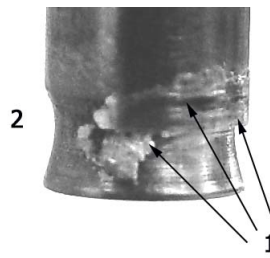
The shape of the modified pin (2) and the material deposits after welding (1).
